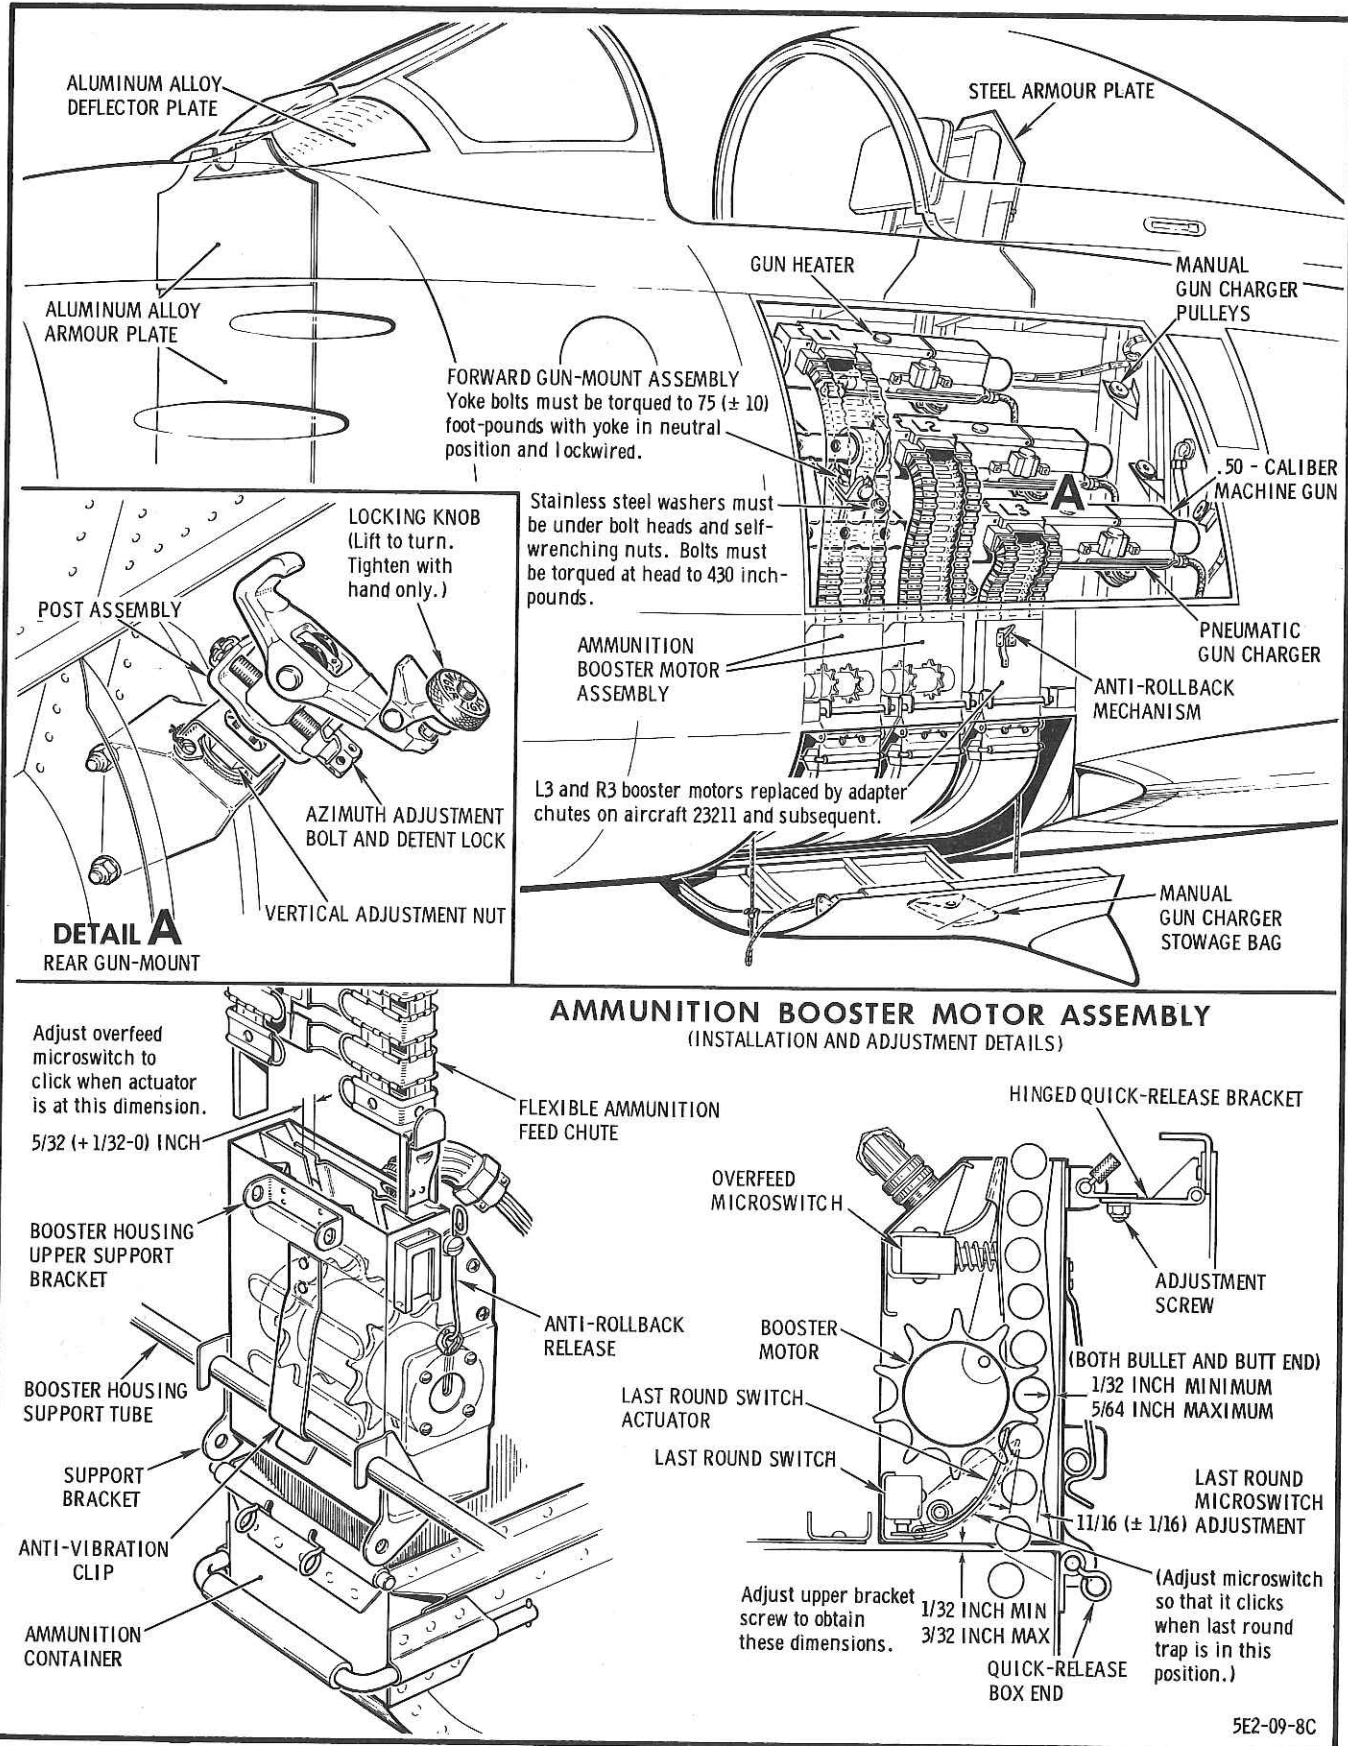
(Sheet 1 of 2) (M) Gun Installation Details
